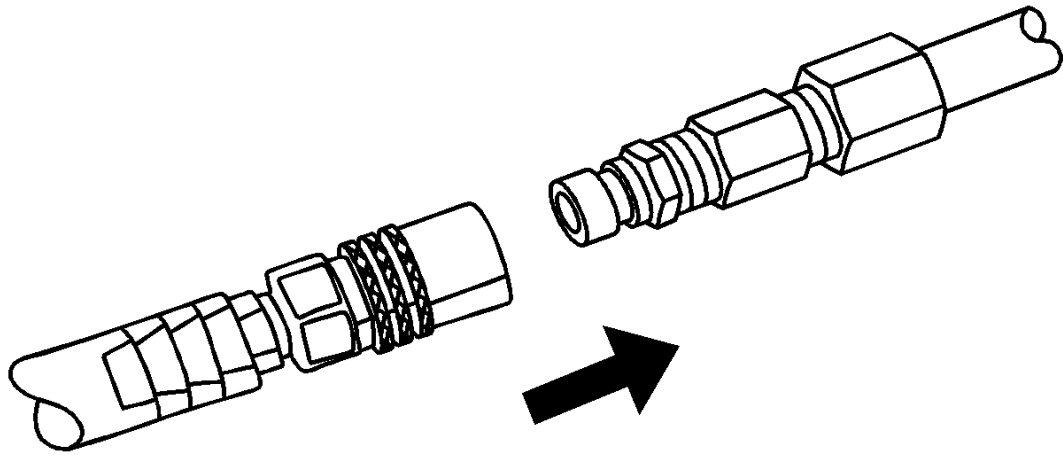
Attaching Extraction Hose To Vacuum Hose
